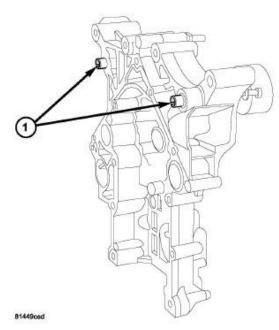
FRONT COVER SLIDE BUSHINGS Courtesy of CHRYSLER LLC
